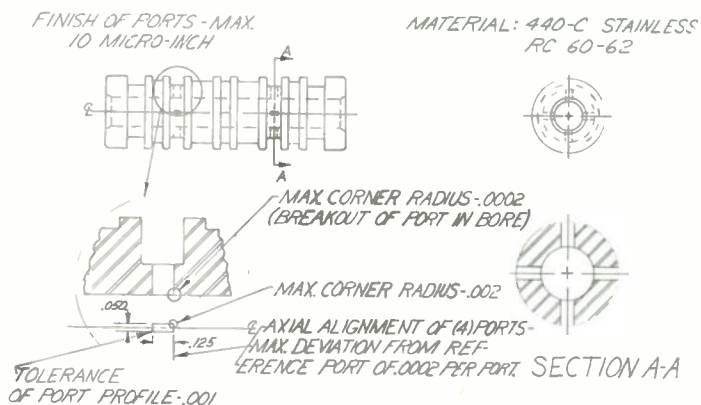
Hydraulic servo valve body. Ports areas to be machined shown in sectional views.
